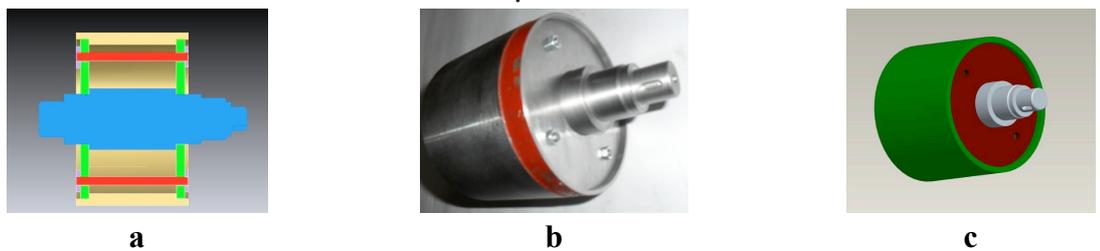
Variant F₁₁₃ – Cylinder + short cylindrical caps, assembled with screws or long bolts:
